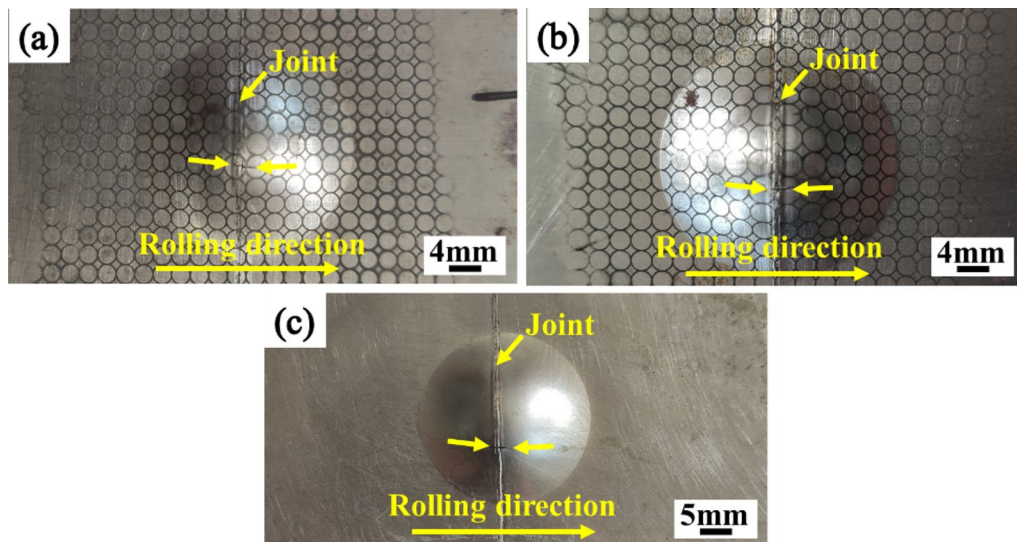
Failure locations of Erichsen cupping test blanks of joints: a QP-DP joint, b QP-QP joint and c DP-DP joint
